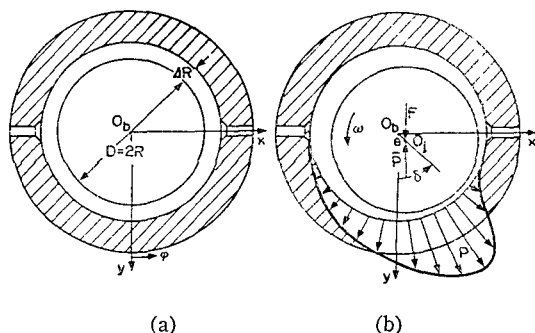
Geometry and force equilibrium of a cylindrical journal bearing
